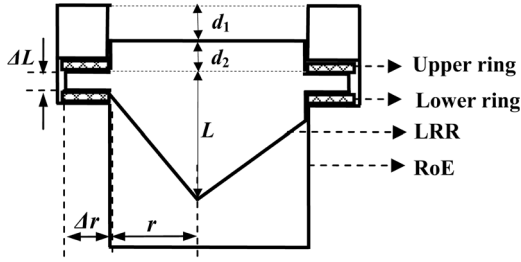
Schematic of laser retroreflector (LRR) mounting assembly; RoE = retainer ring or enclosure.
